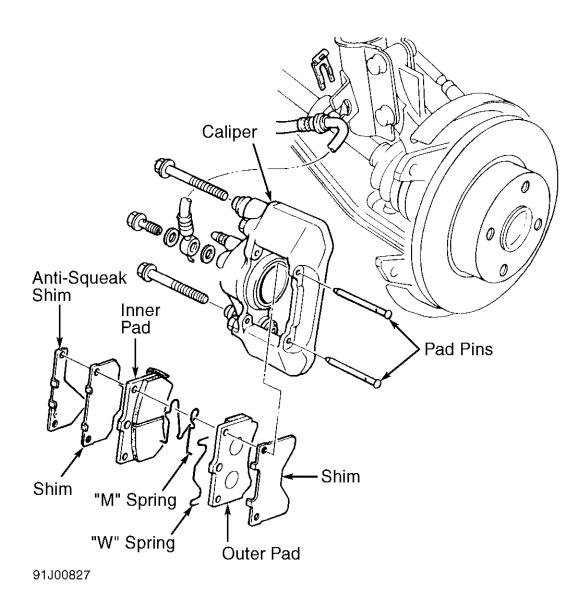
Exploded View Of Front Disc Brake Assembly (MX-3 & Protege) Courtesy of MAZDA MOTORS CORP.
